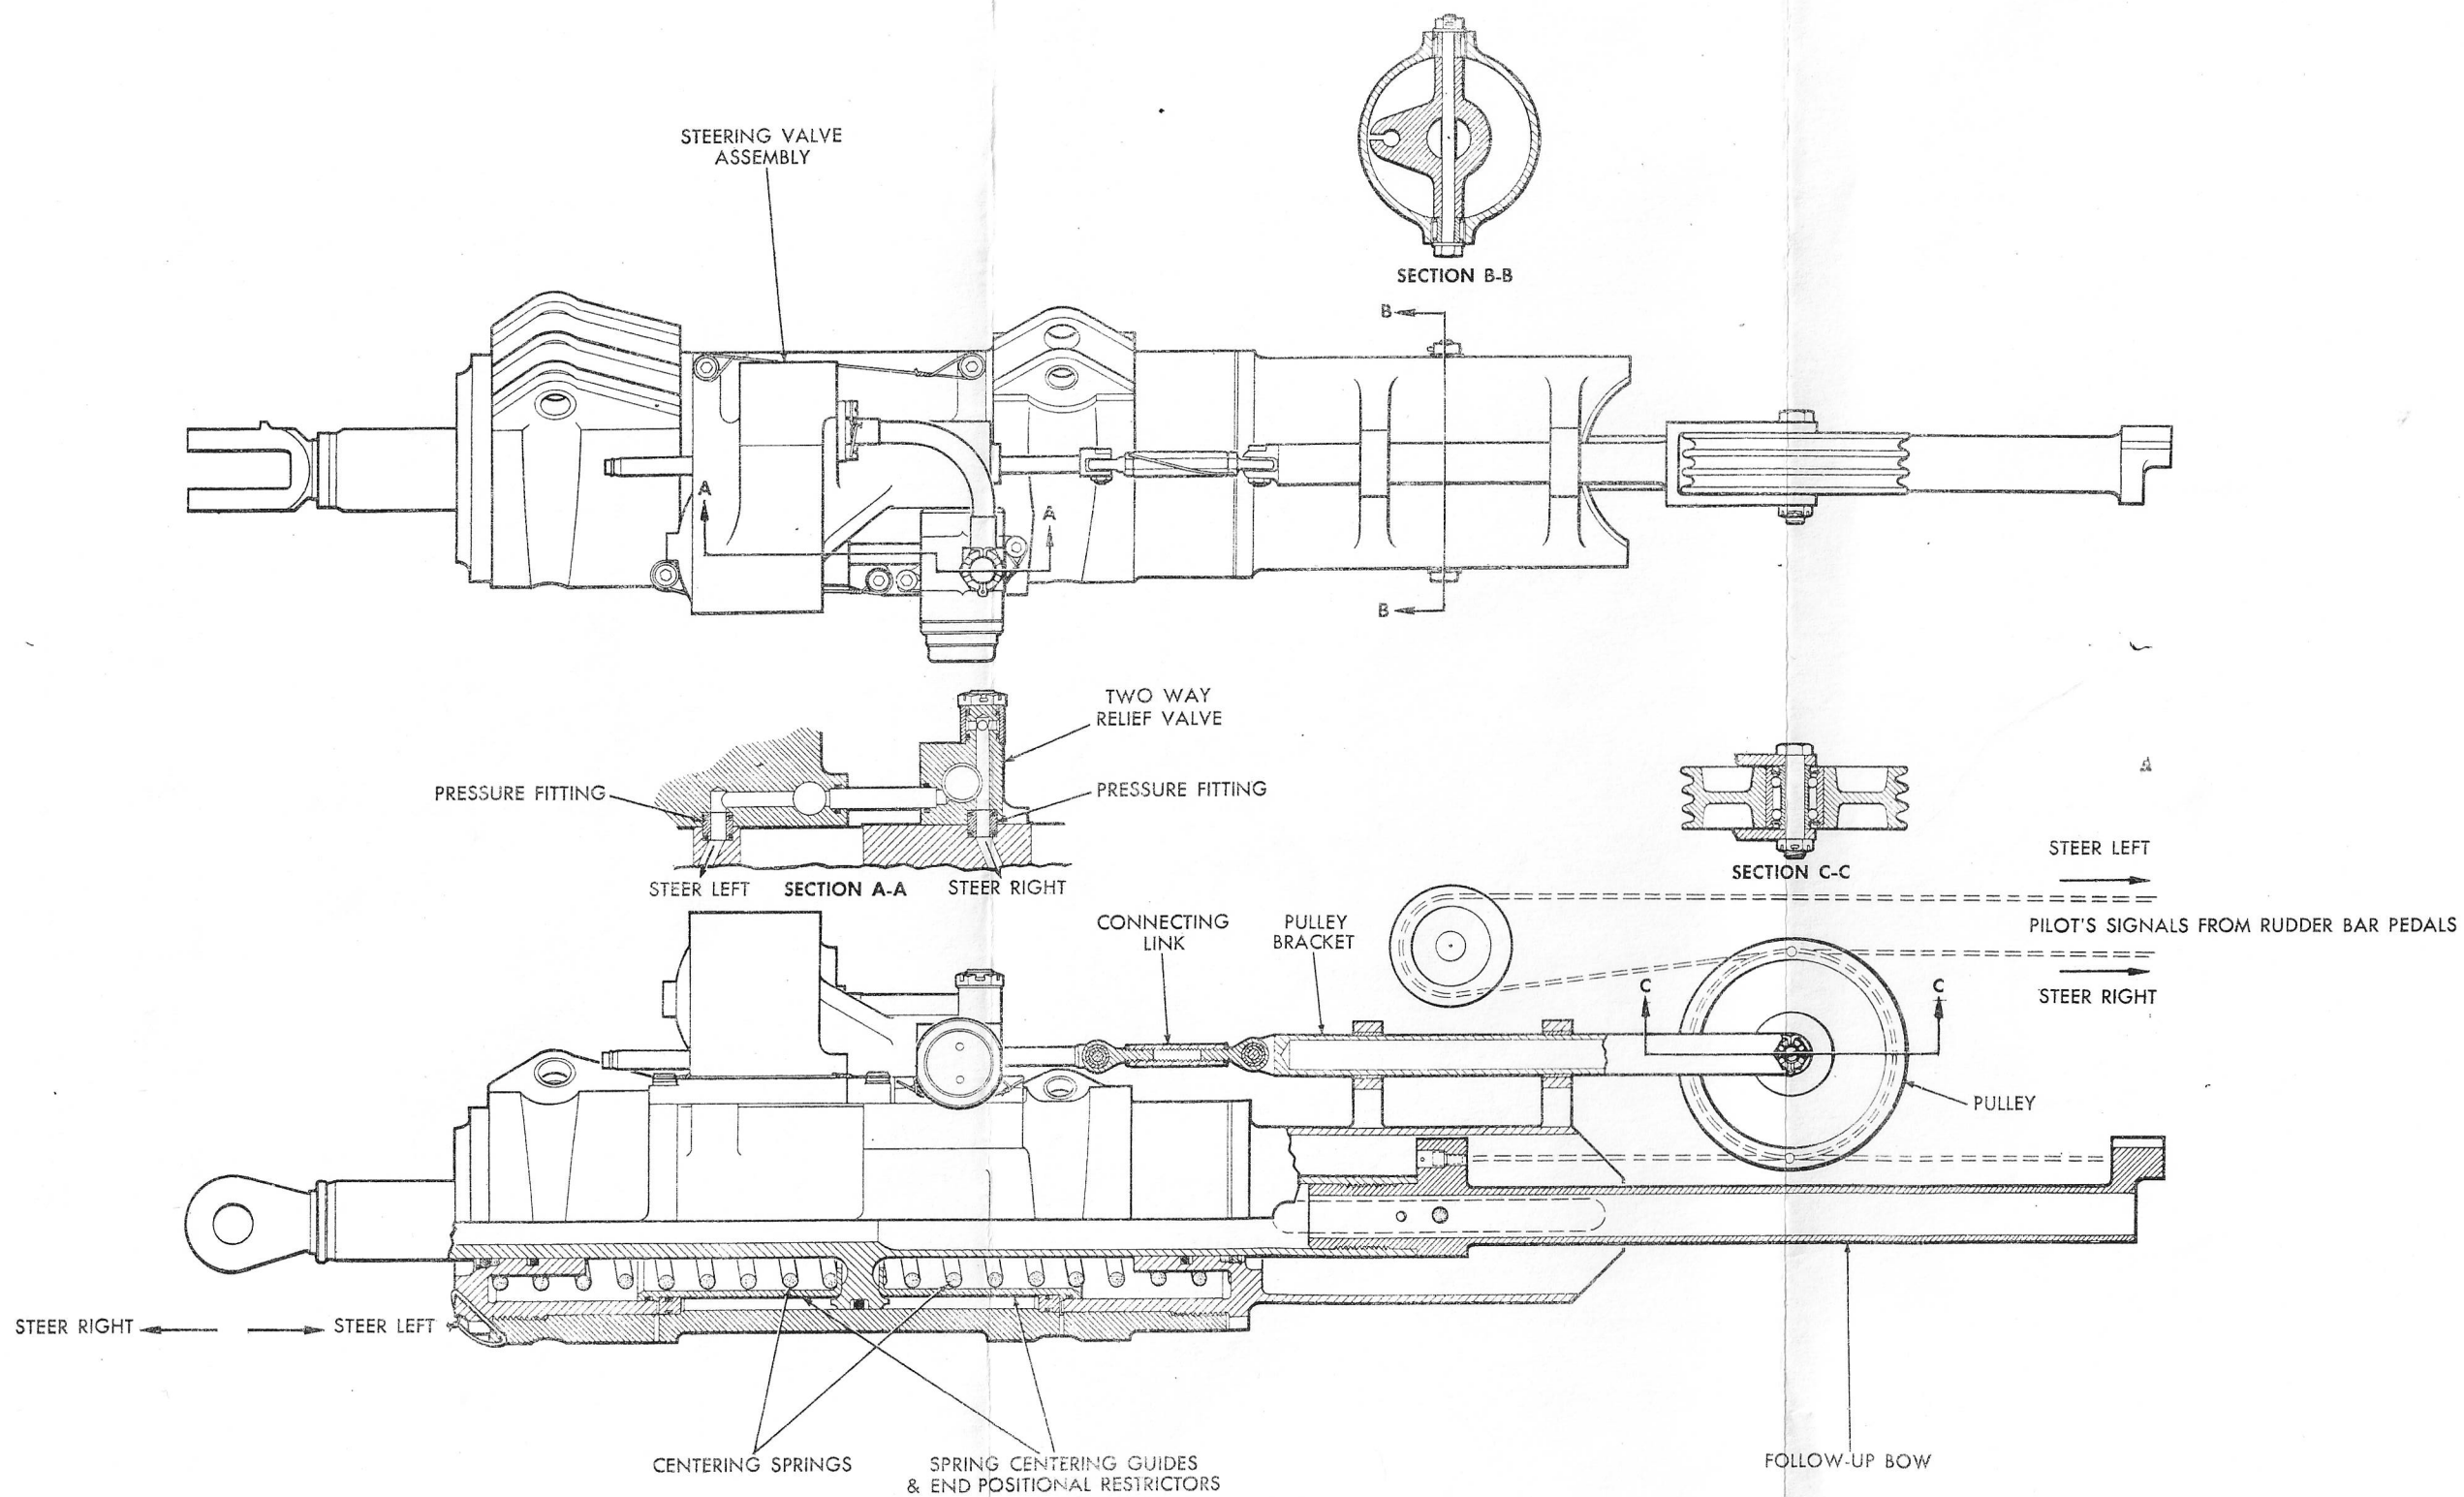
STEERING JACK AND CONTROL VALVE
